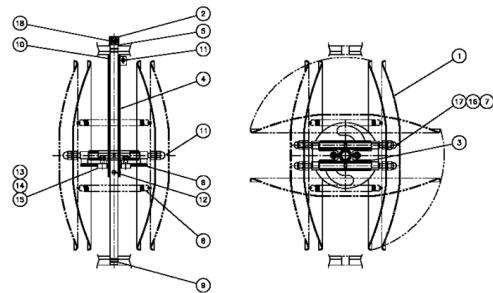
Disk assembly drawing of Gas Tight Shut-off Valve
